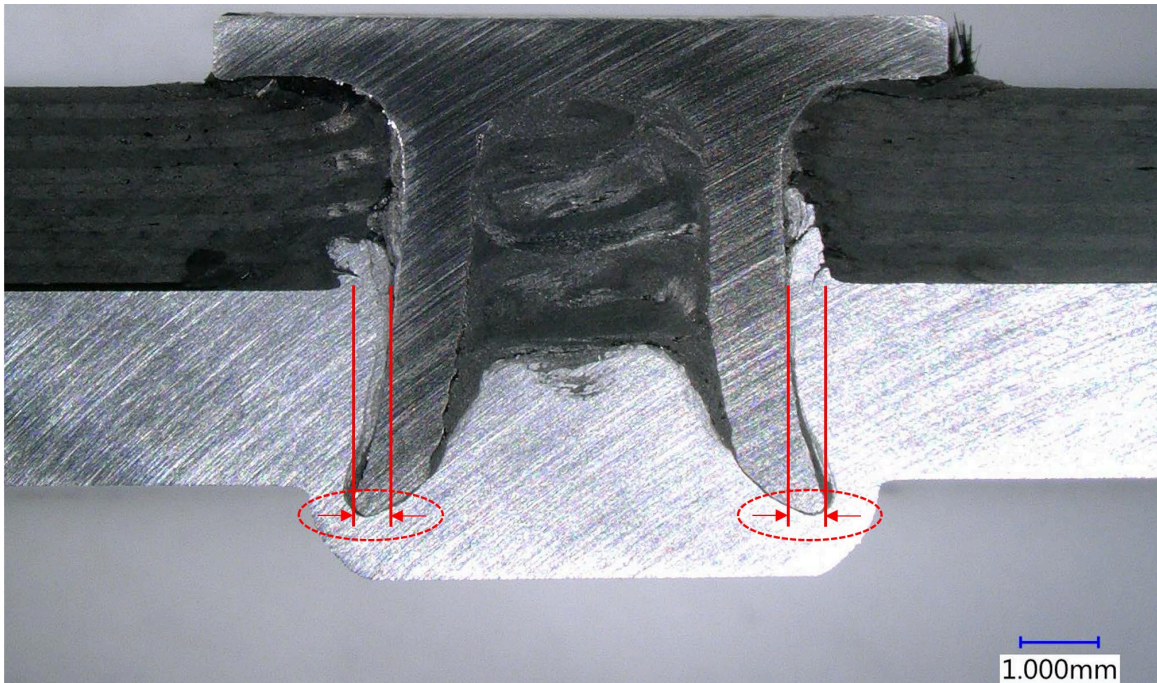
Optical image of TS CFRC-Al7055 F-SPR joint cross-section, showing mechanical interlocking between the flared rivet leg and bottom Al7055 sheet, as well as the crack-free joint on the Al sheet.
